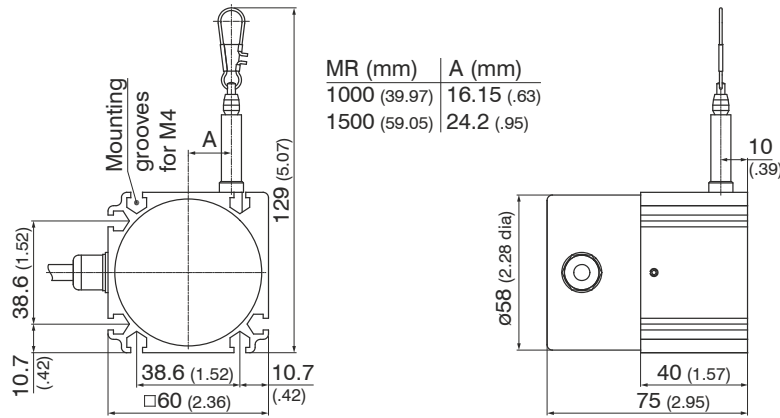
Dimensional drawing ... - FD60 - CR - HTL/TTL, dimensions in mm (inches), not to scale
